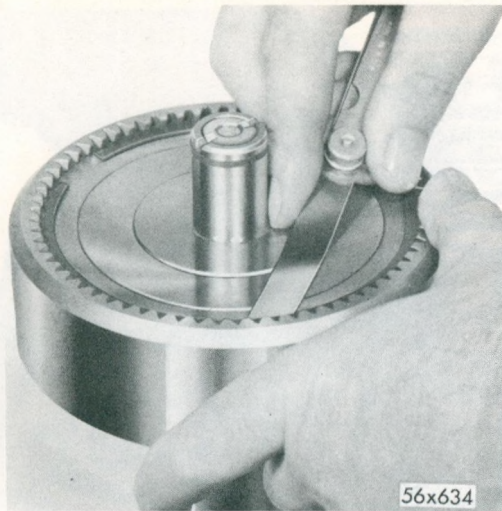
Checking Clearance between Kickdown Annulus Gear Snap Ring and Intermediate Shaft Assembly
